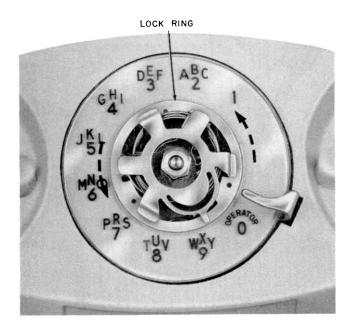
8-Type Dial, Fingerwheel Removed to Show Lock Ring
